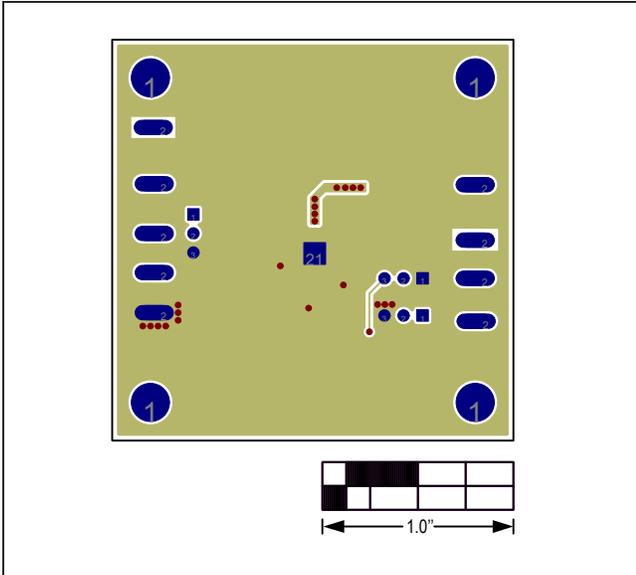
MAX17545 5V Output EV Kit PCB Layout—Solder Side
